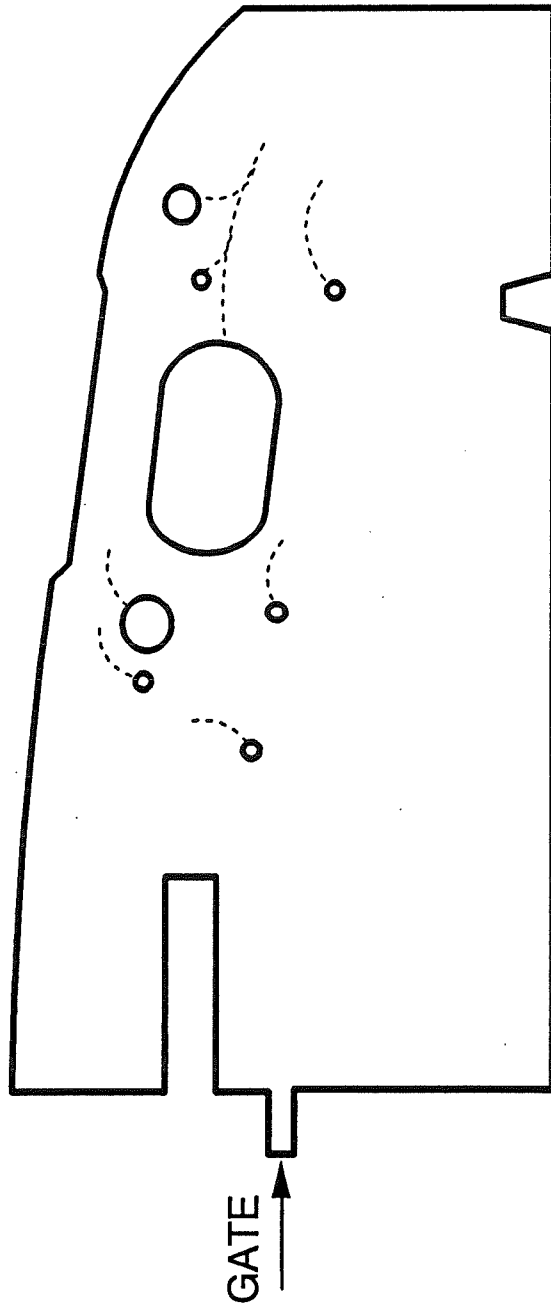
Weldlines detected by visual inspection in an experimental simple gated mold representing half of a passenger vehicle instrument panel¹⁷⁵
